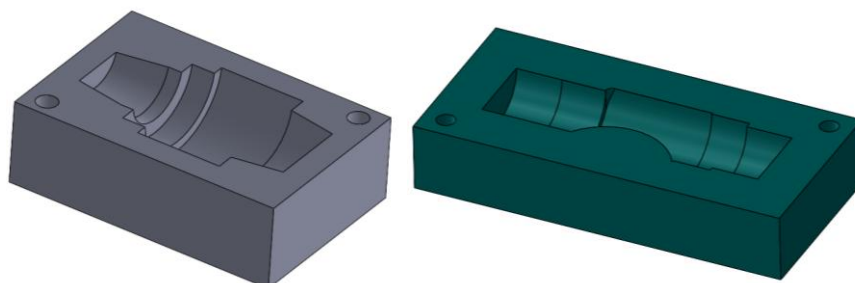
Cores with bore, for gear wheel bore (right-hand) and worm screw bore (left-hand)
